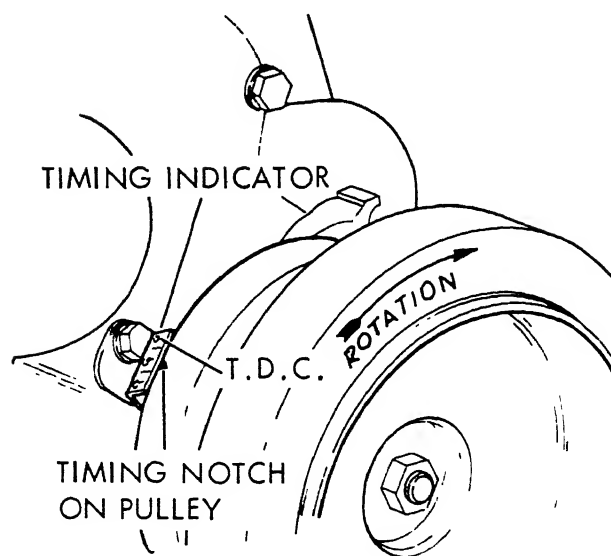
Distributor assembly removal, replacement, and timing. (Sheet 2 of 2)
